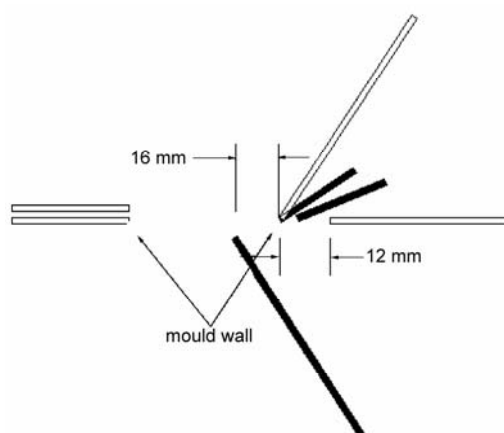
Isoparametric view showing how the thermocouples and ceramic tubes were placed for displacement measurements
